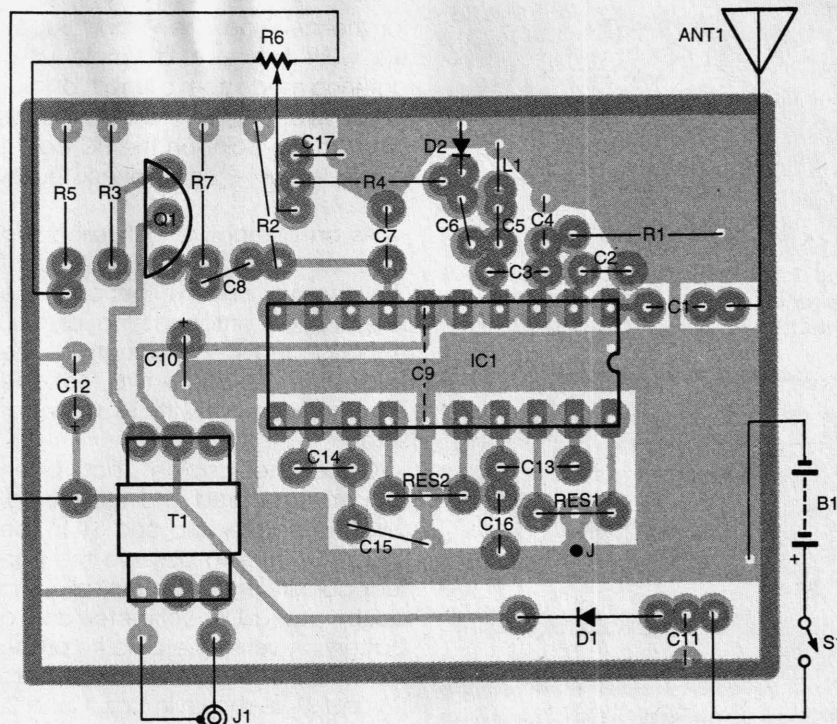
Here's the parts-placement diagram for the Airport Buddy. Note that C9 is tack-soldered to the solder side of the board between the pins of IC1. Keep the body of C9 flat to the board.
